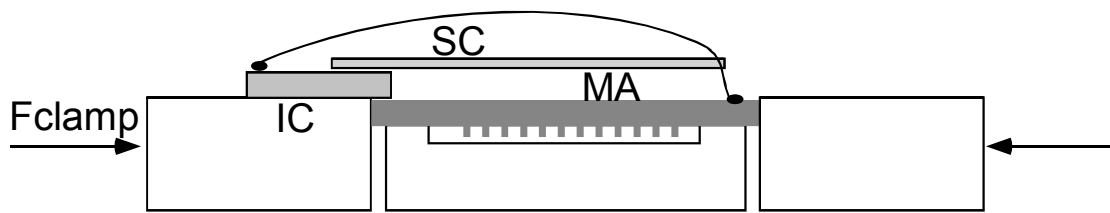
Schematic cross-section illustrating the assembly and bonding setup.
